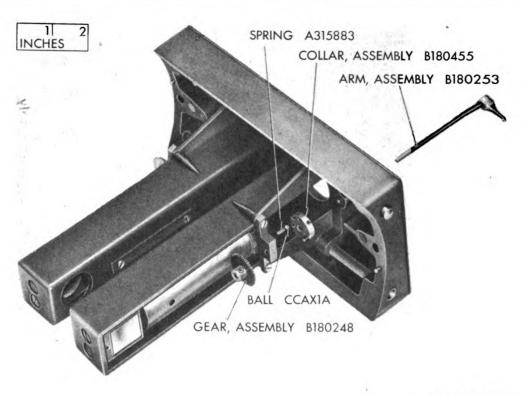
Filter Index Arm Assembly — Exploded From Telescope Assembly
